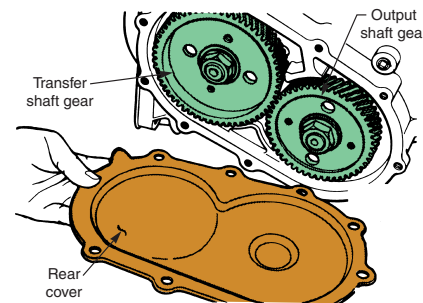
Drive gears are installed behind a sheet metal cover. They should be checked for wear or damage. (General Motors)
